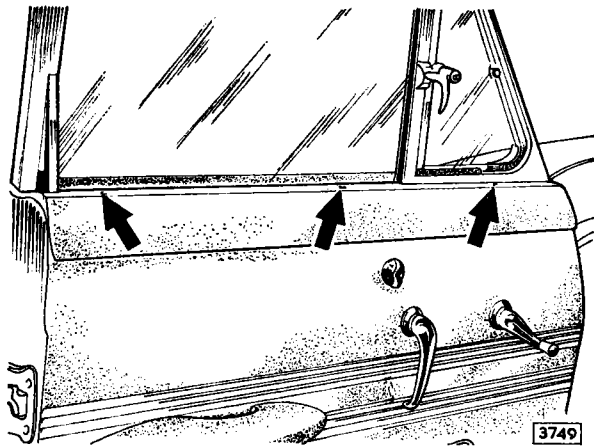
Showing the three screws which secure the padded waist rail to the door frame
